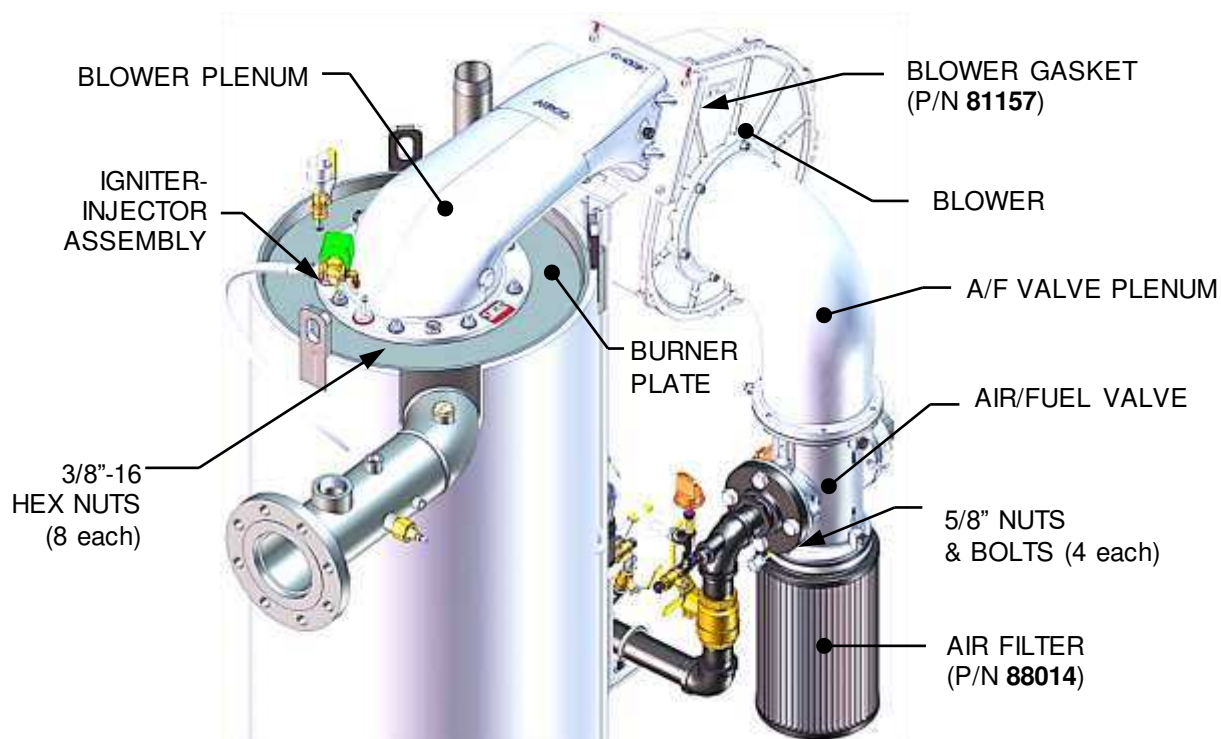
Burner Assembly Mounting Details – BMK2500 - 5000N
